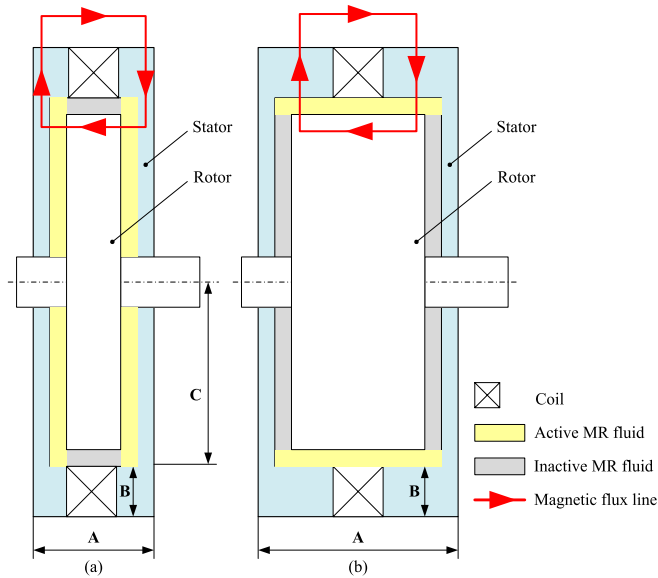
Structure of conventional MR brake: (a) Disc type and (b) Drum type
